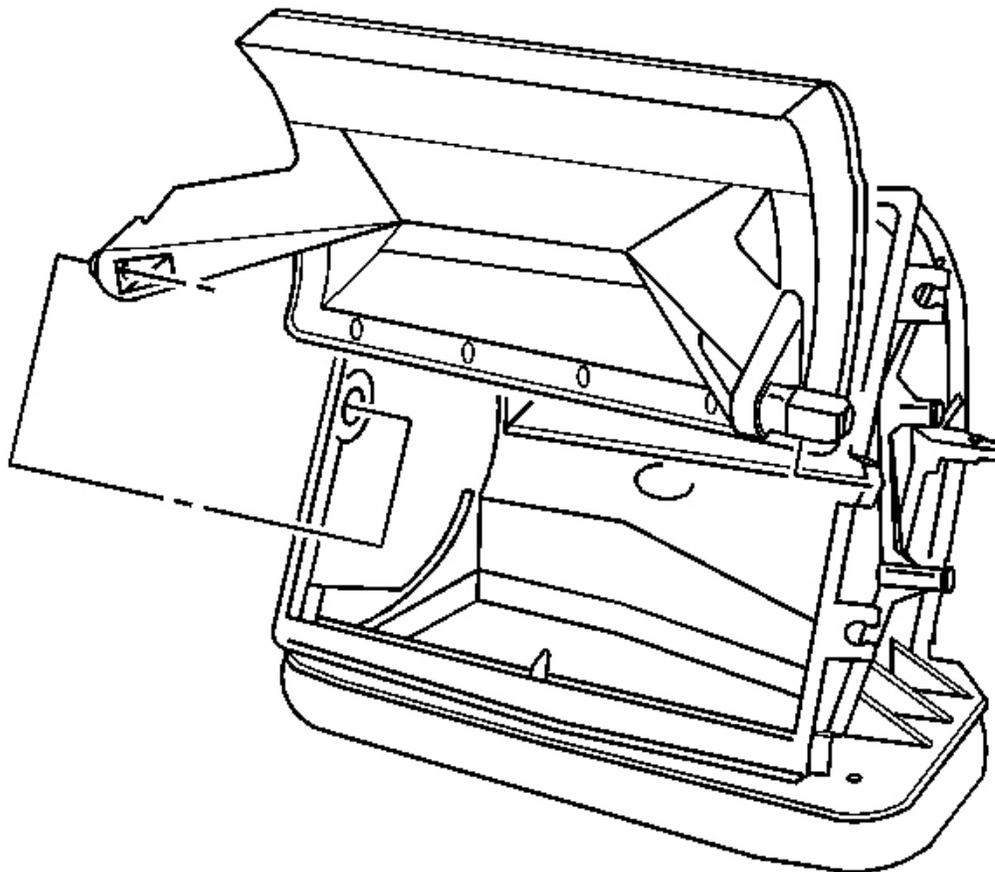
Identifying Air Inlet Door & Recirculation Housing
